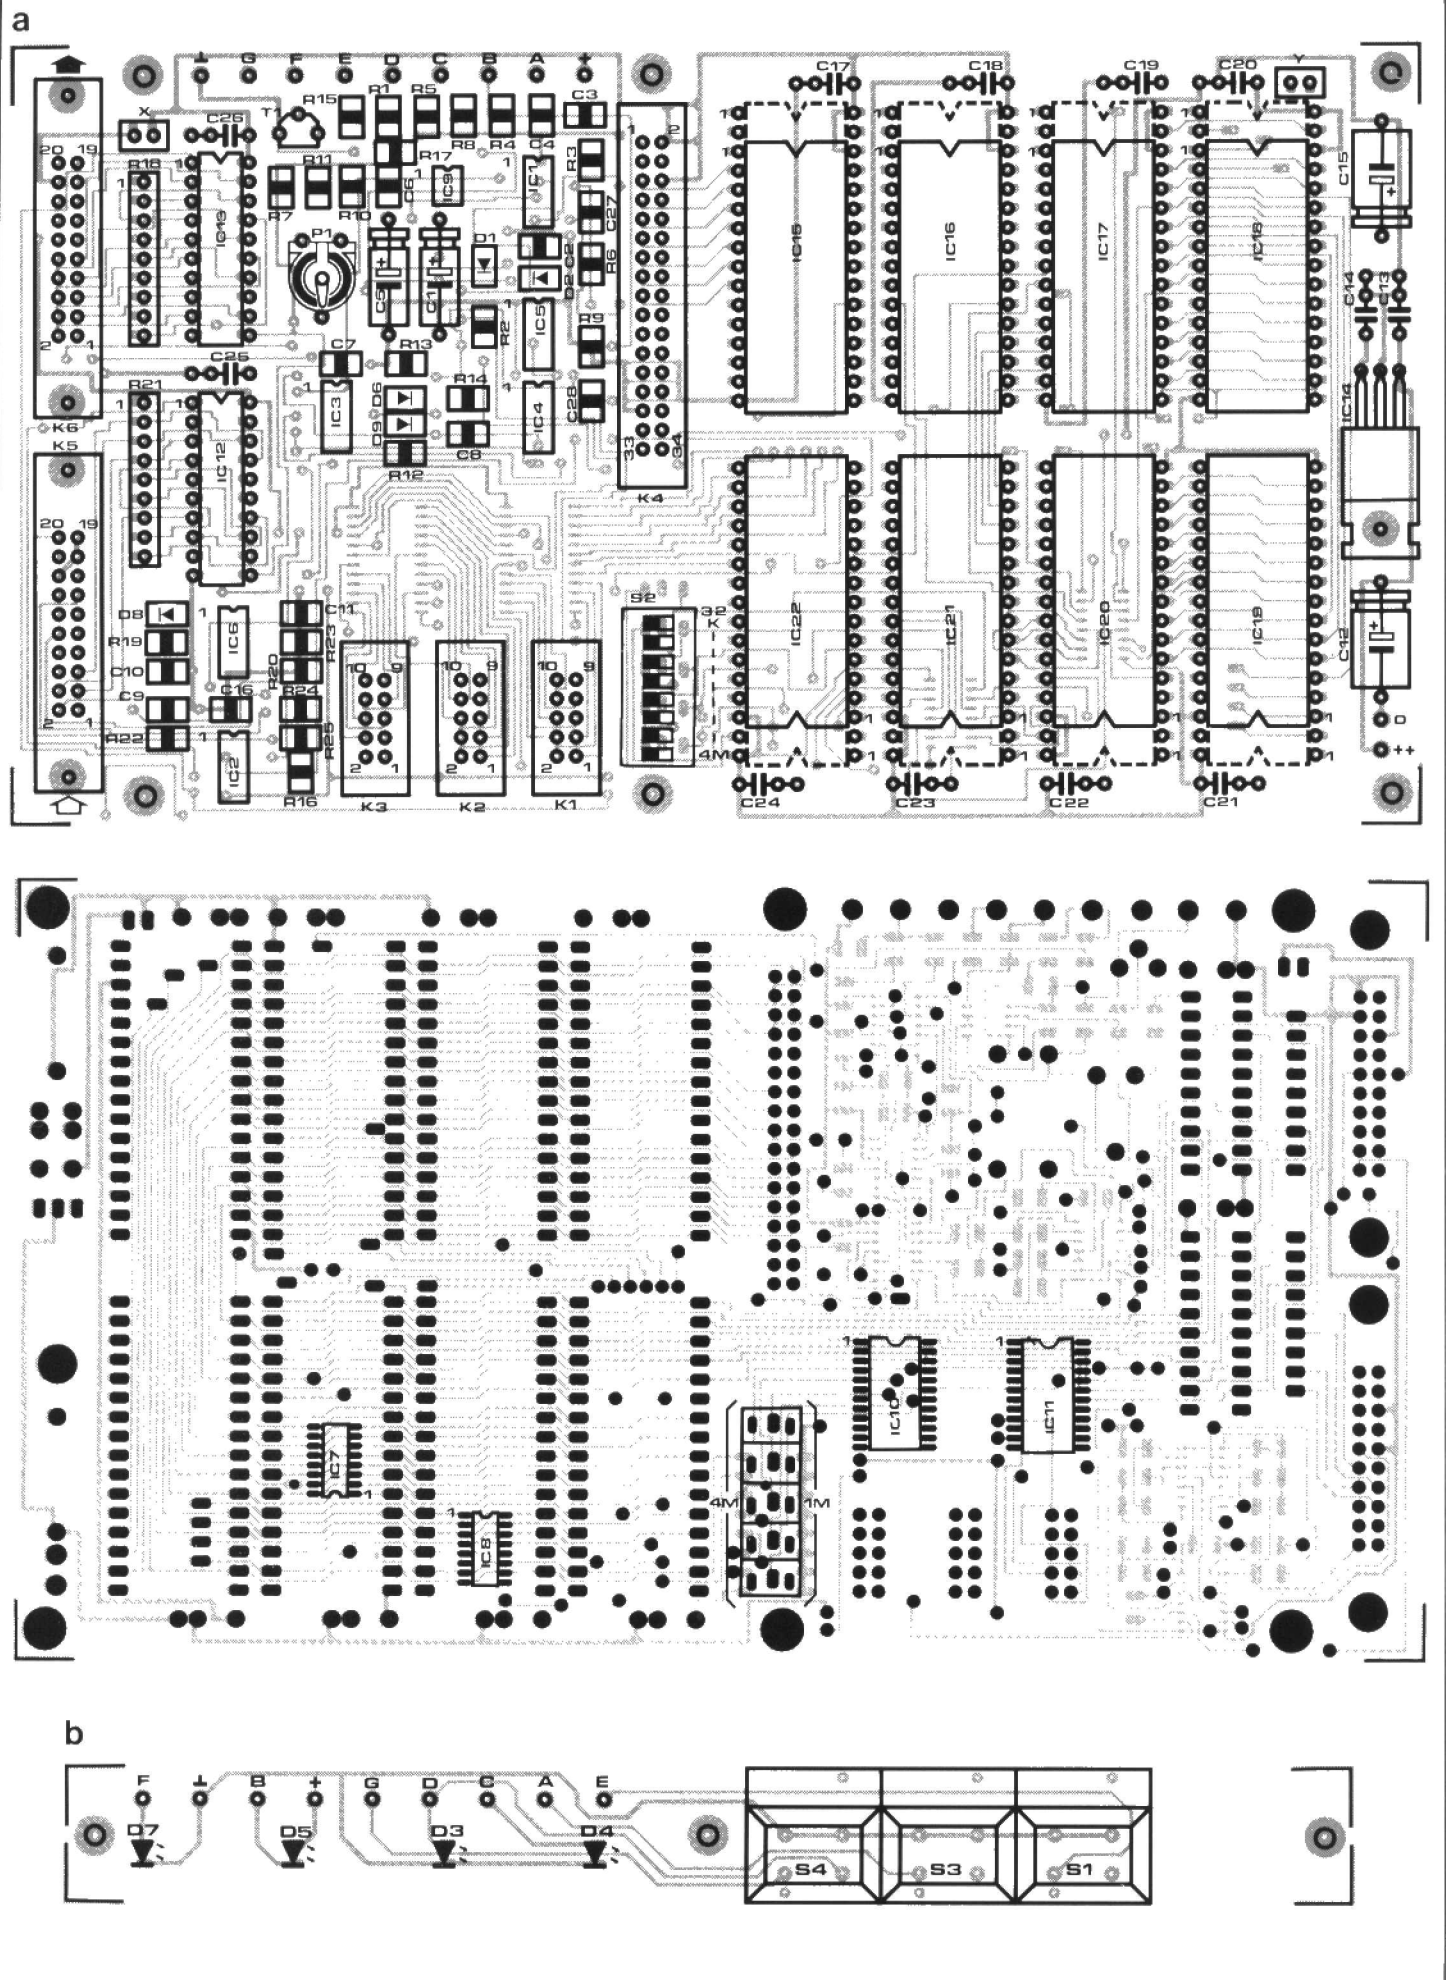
Component mounting plan of the main board (4a), and the keyboard (4b).
